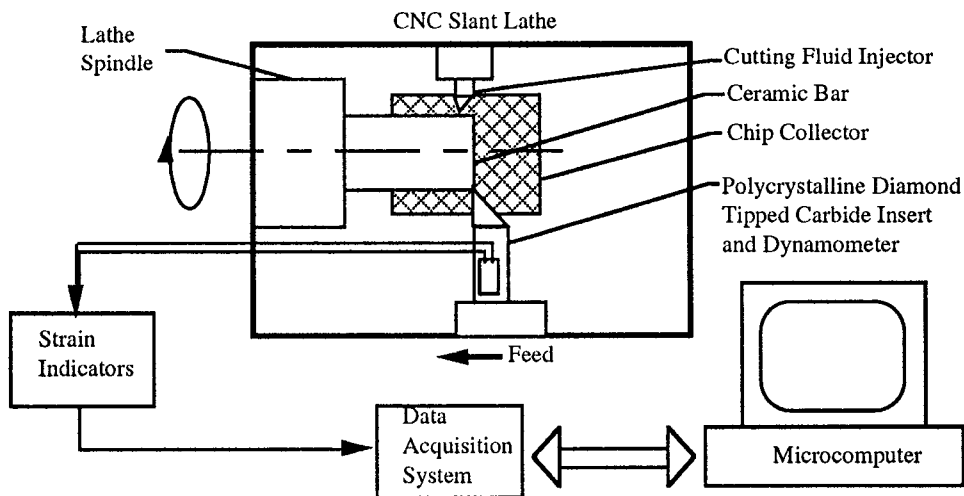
EXPERIMENTAL SETUP FOR MACHINING ALUMINA
